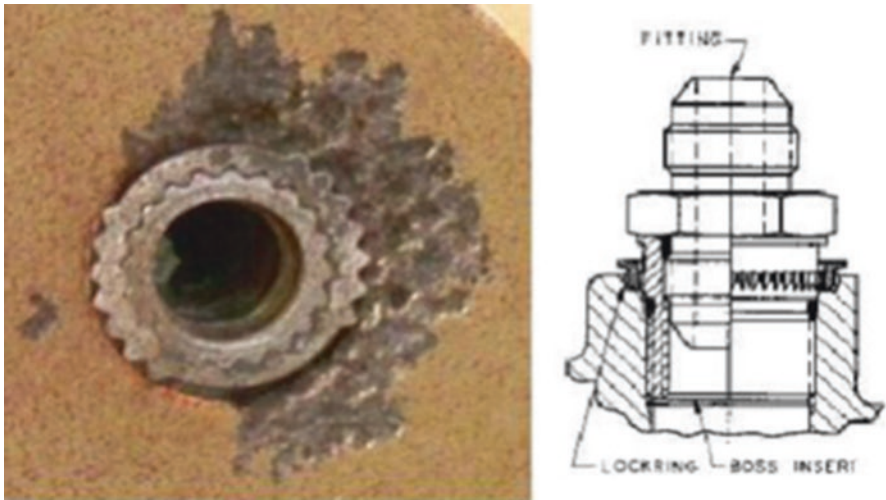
Rosan insert. *Left* – shows corrosion around insert on a helicopter magnesium gearbox housing. *Right* – cross section of insert with fitting (Courtesy Robert Kestler, FRC-E)
